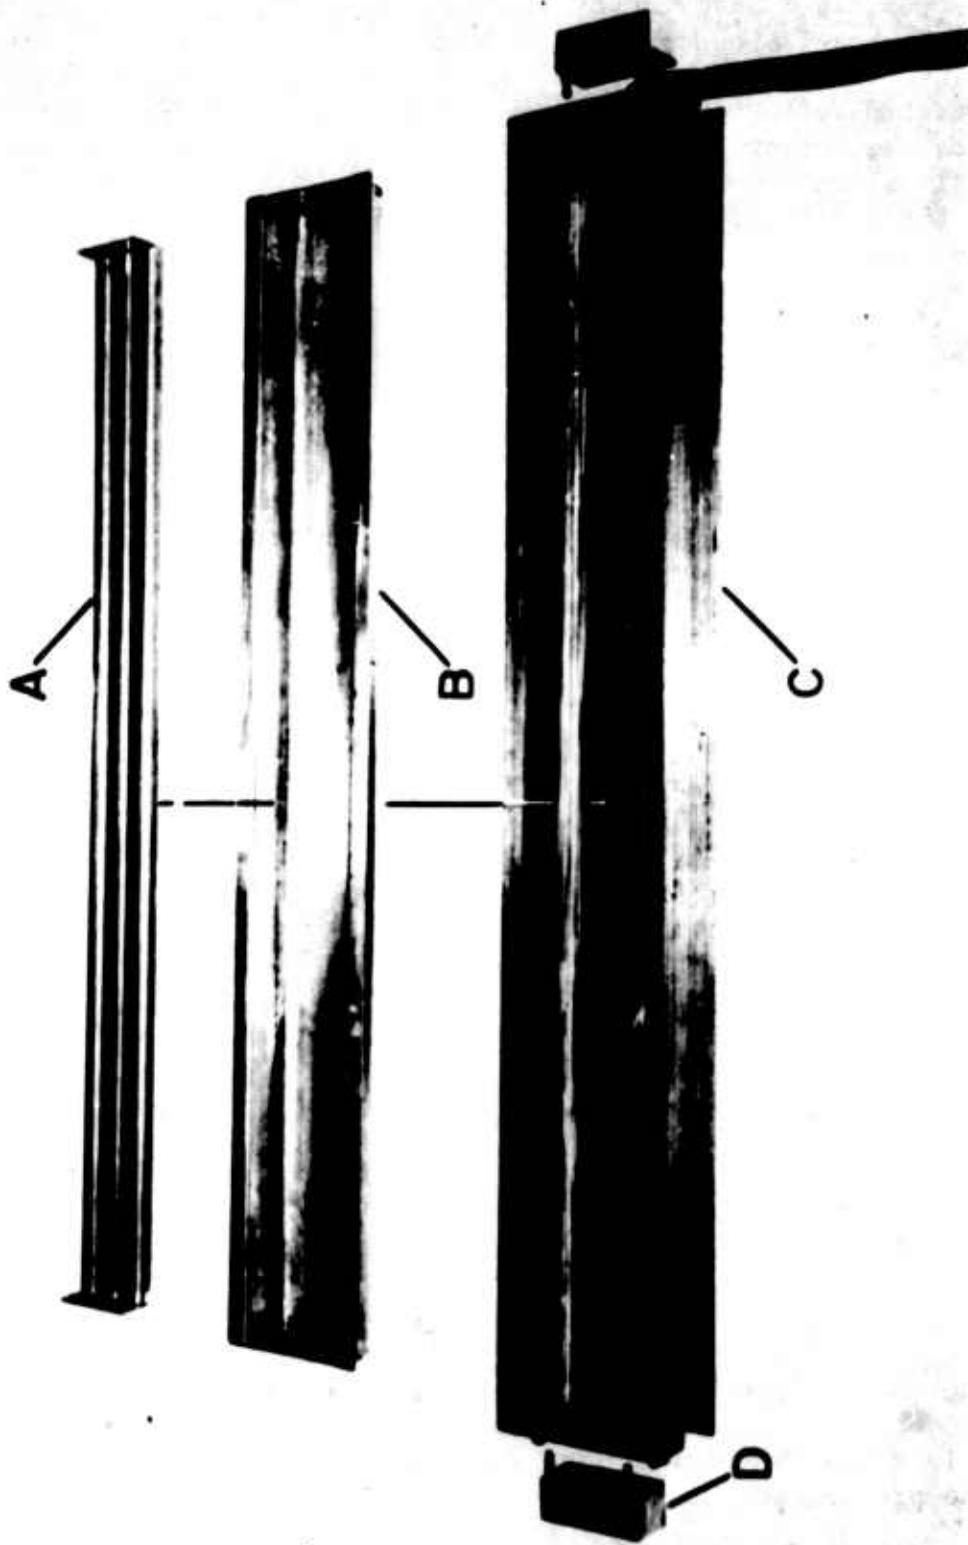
Detail View of Resin Vat Assembly. A, One-Inch-Diameter Rollers That Separate Fibreglass Fabric Layers Inside Vat; B, Resin Vat; C, Heating Shroud (Longitudinal Heating Strips are Visible); D, Pin-Block Which Pins Together and Mounts Vat Assembly to Coating Machine, One Per Side (Pins Permit Quick Disassembly for Cleaning).
